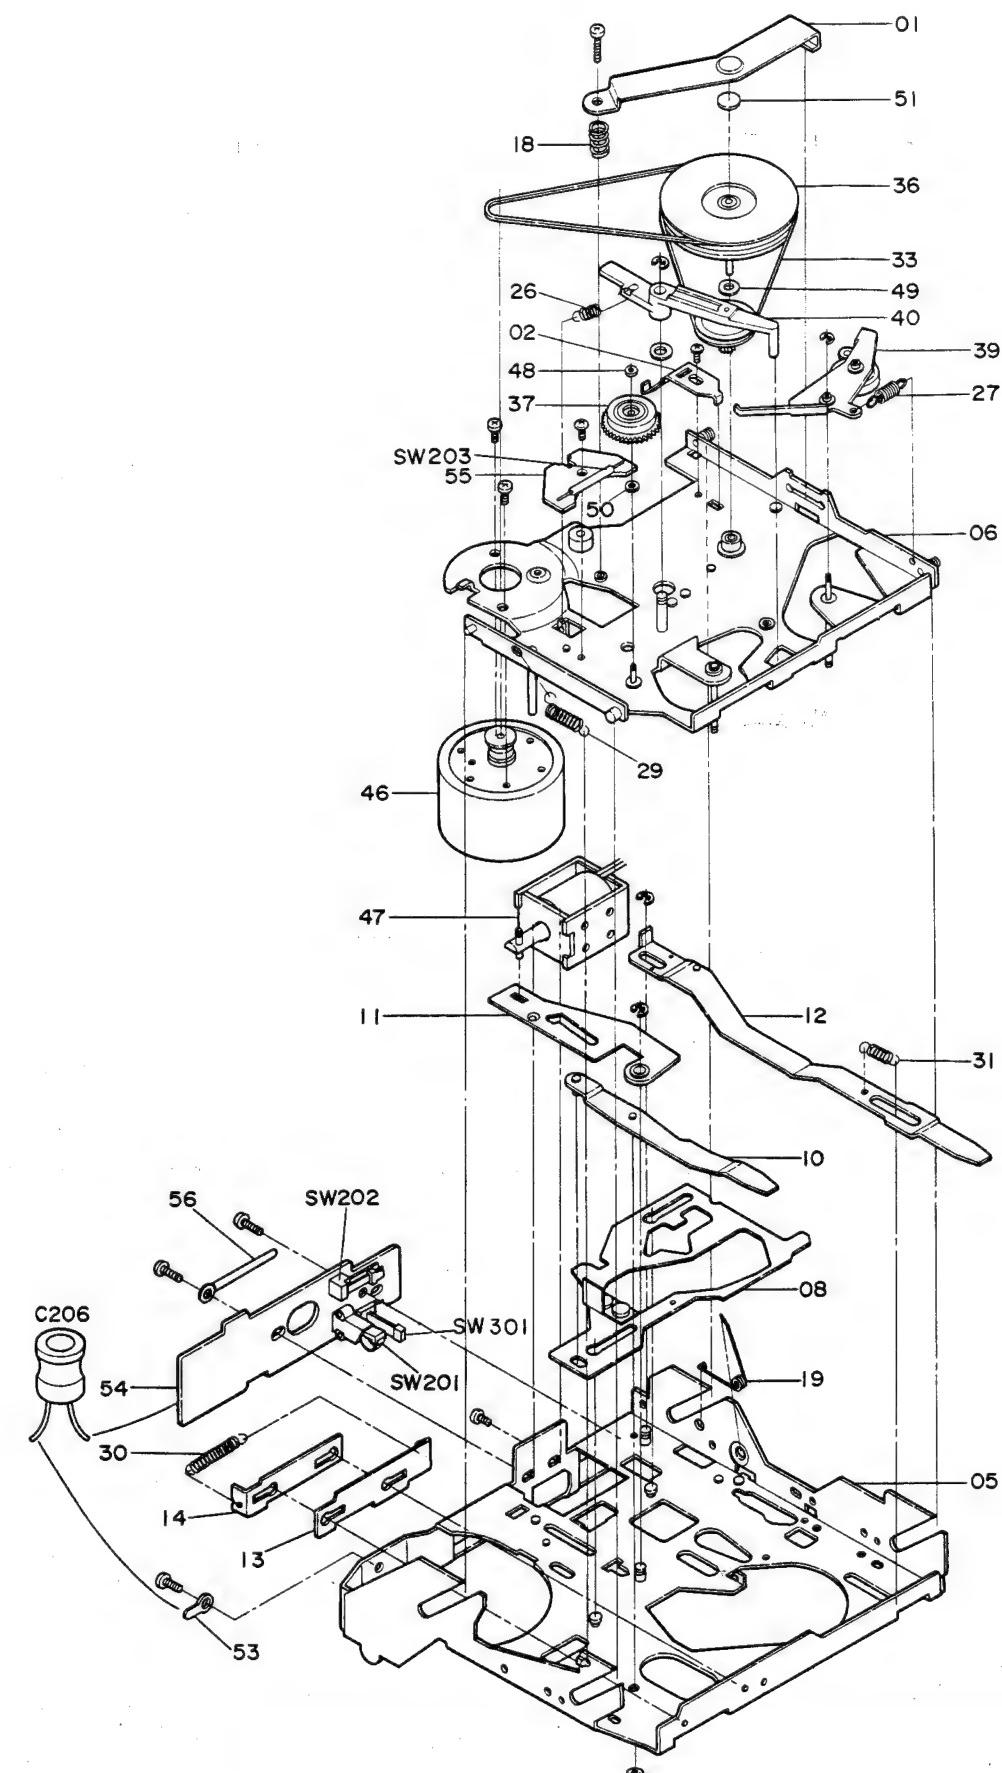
MECHANISM EXPLODED VIEW (LOWER SIDE)
